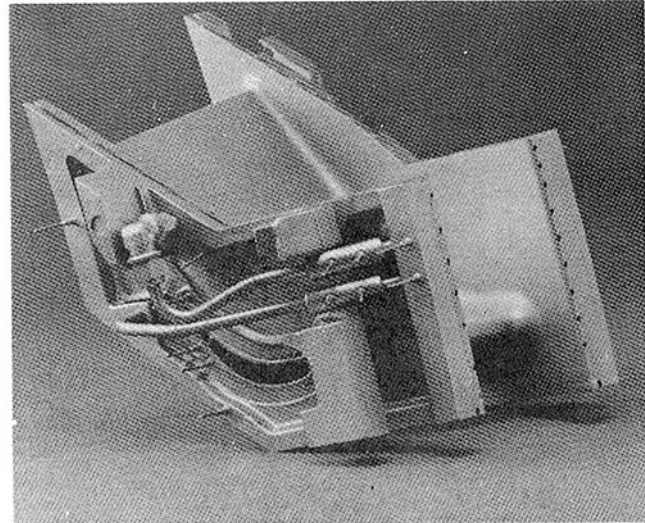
Second-stage nozzle braze assembly as viewed from the inner endwall side
